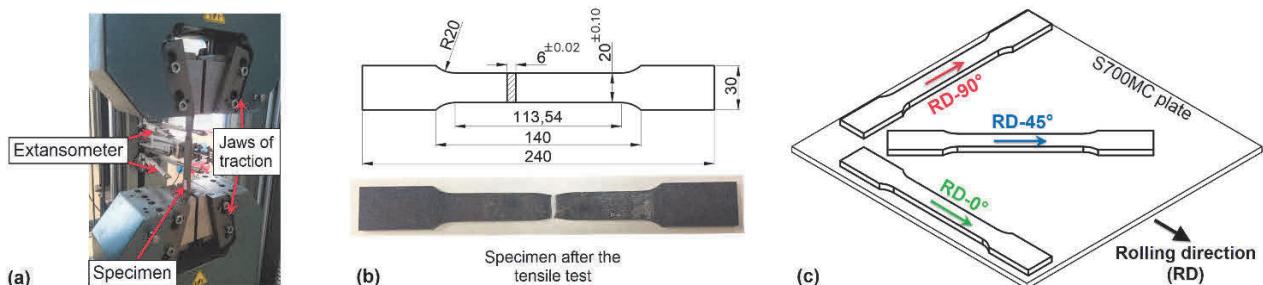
a) Tensile test setup, b) the dimensions of a test specimen, and c) layout of specimens at different orientations on S700MC plate.
